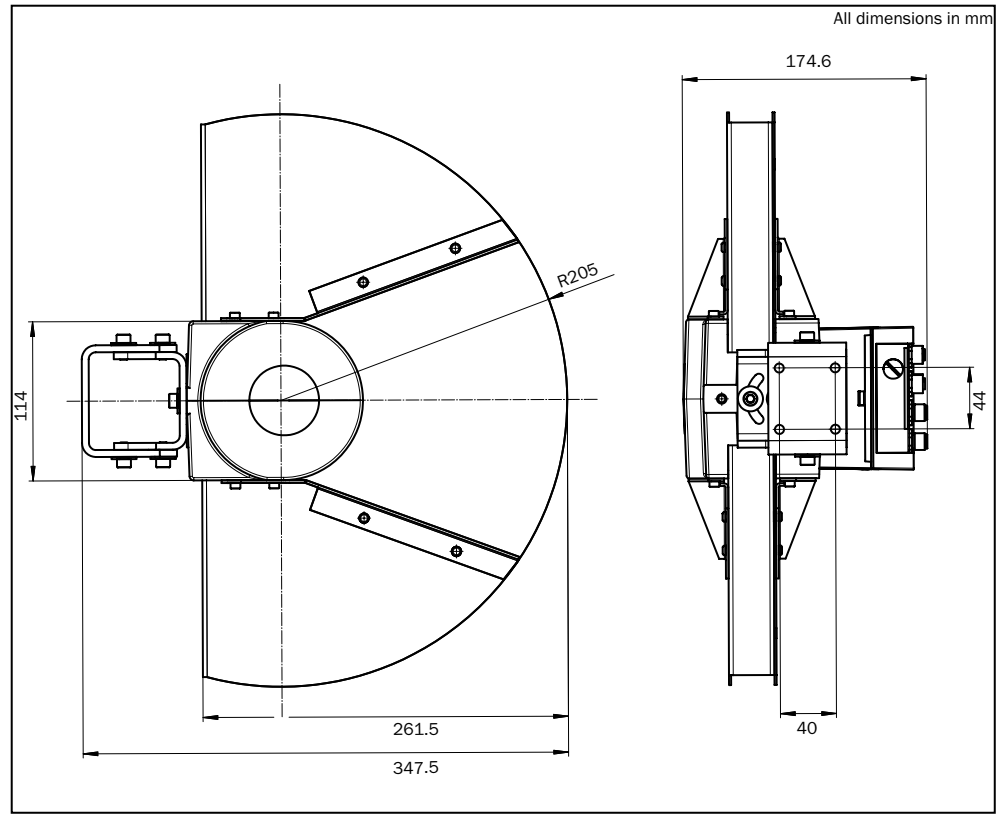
Dimensional drawing weather protection hood 190° (part no. 2046459)
